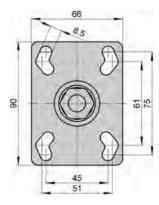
Used in bracket series:LKPA/BKPA:Wheel Ø 80 - 150 mmLKPXA/BKPXA:Wheel Ø 80 - 125 mm
